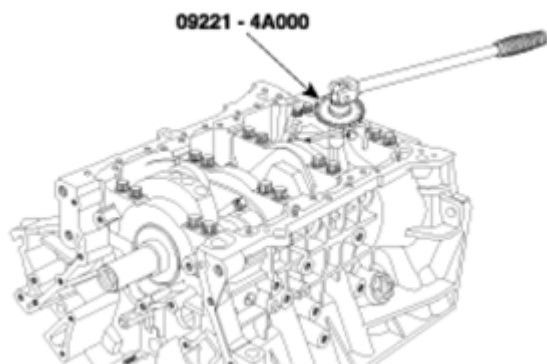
Removing 2 Bolts, Connecting Rod Cap And Bearing Half
